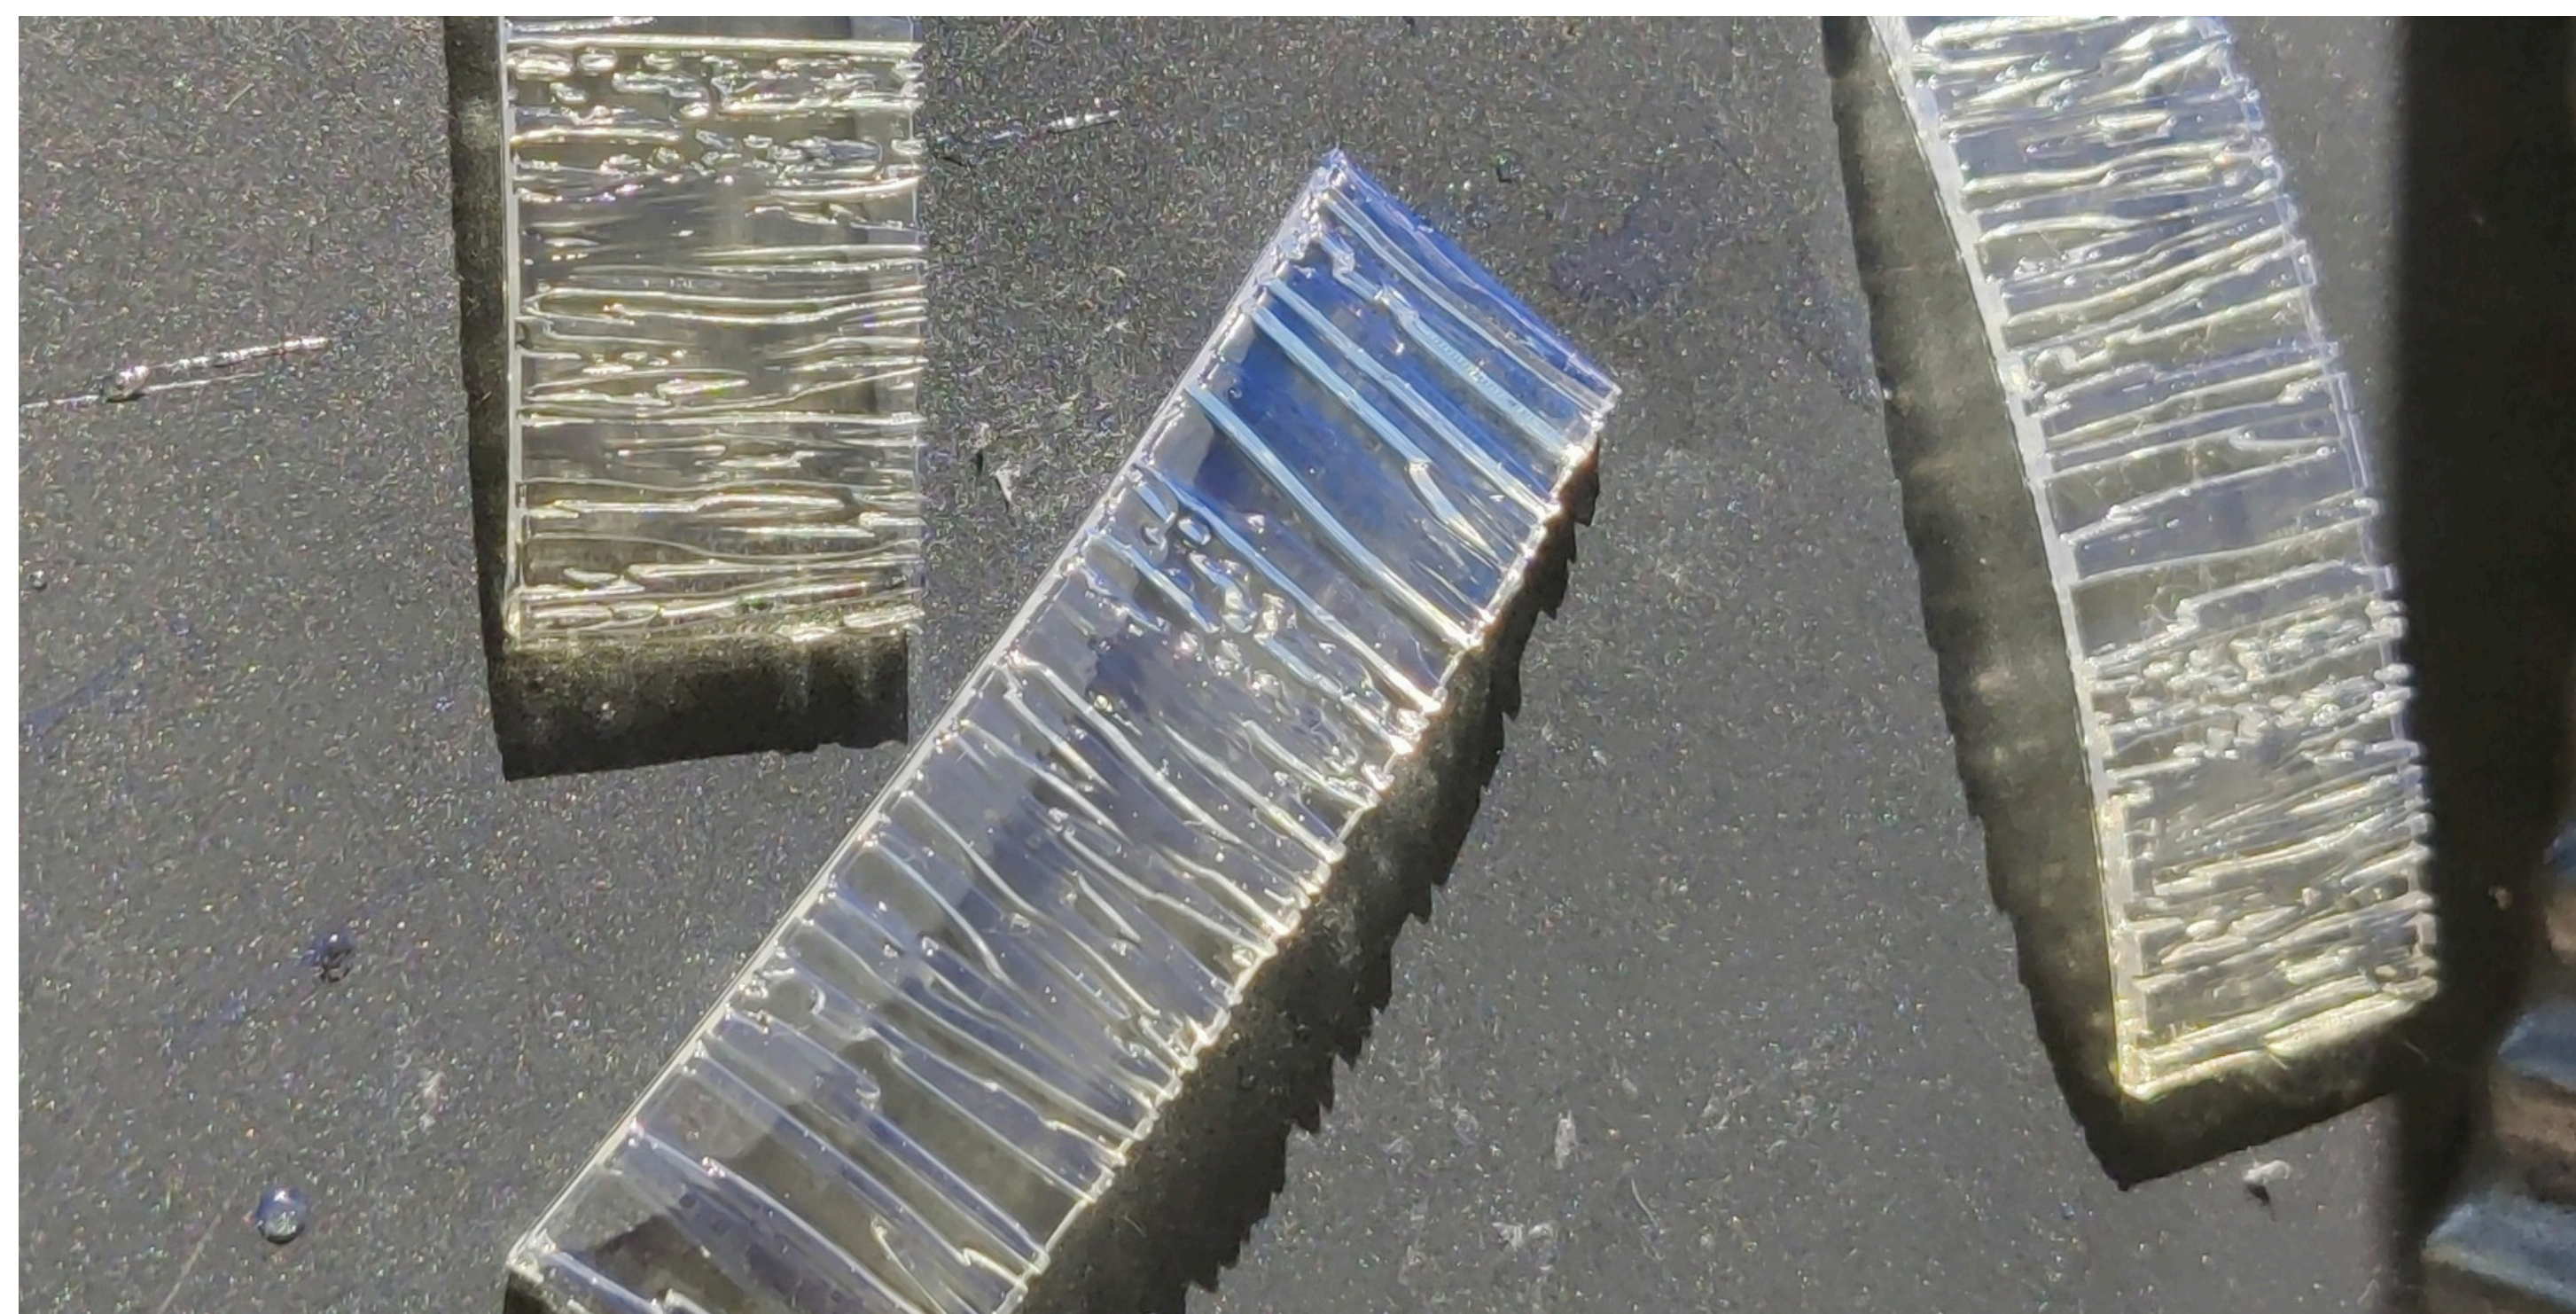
textured strips 3D printed using clear resin (Author, 2024)
